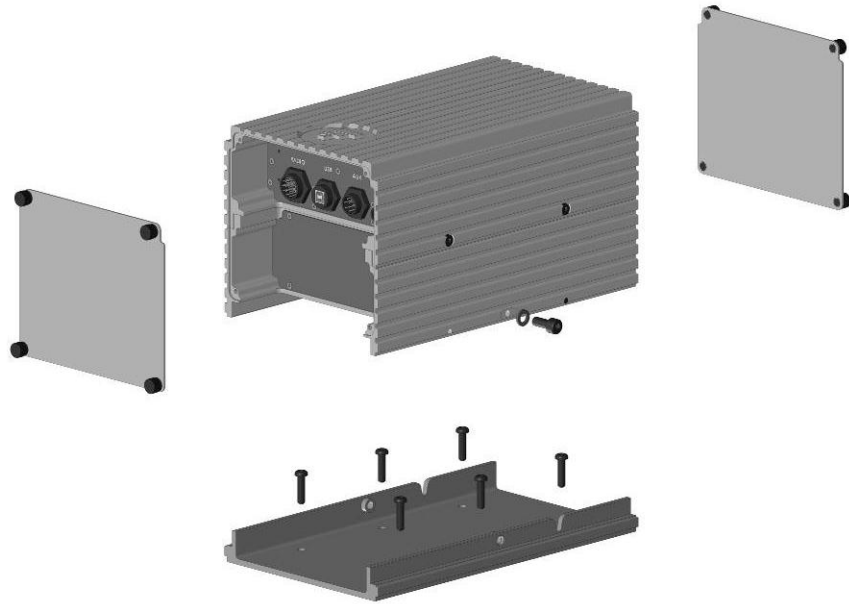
DVR Mounting Details – Full Duplex (With Duplexer)
